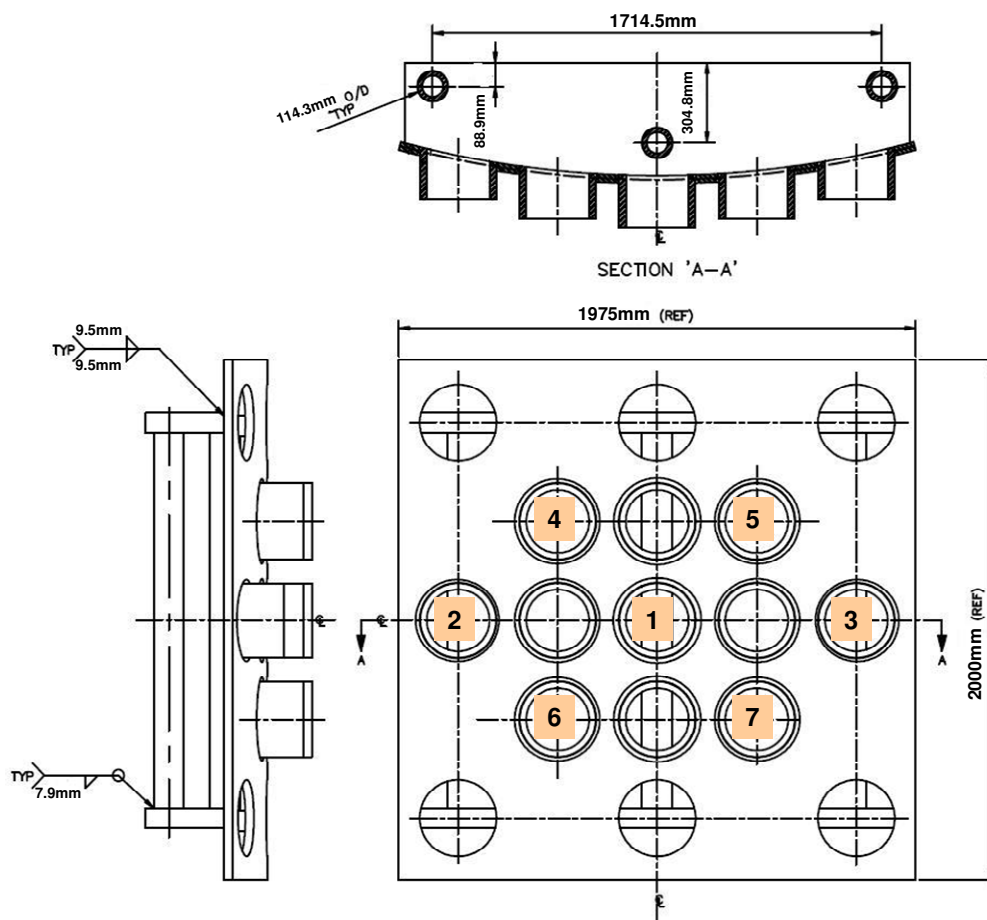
Multi-nozzle Weld Sequence with Rib-Bar Fixture – FEA Study
